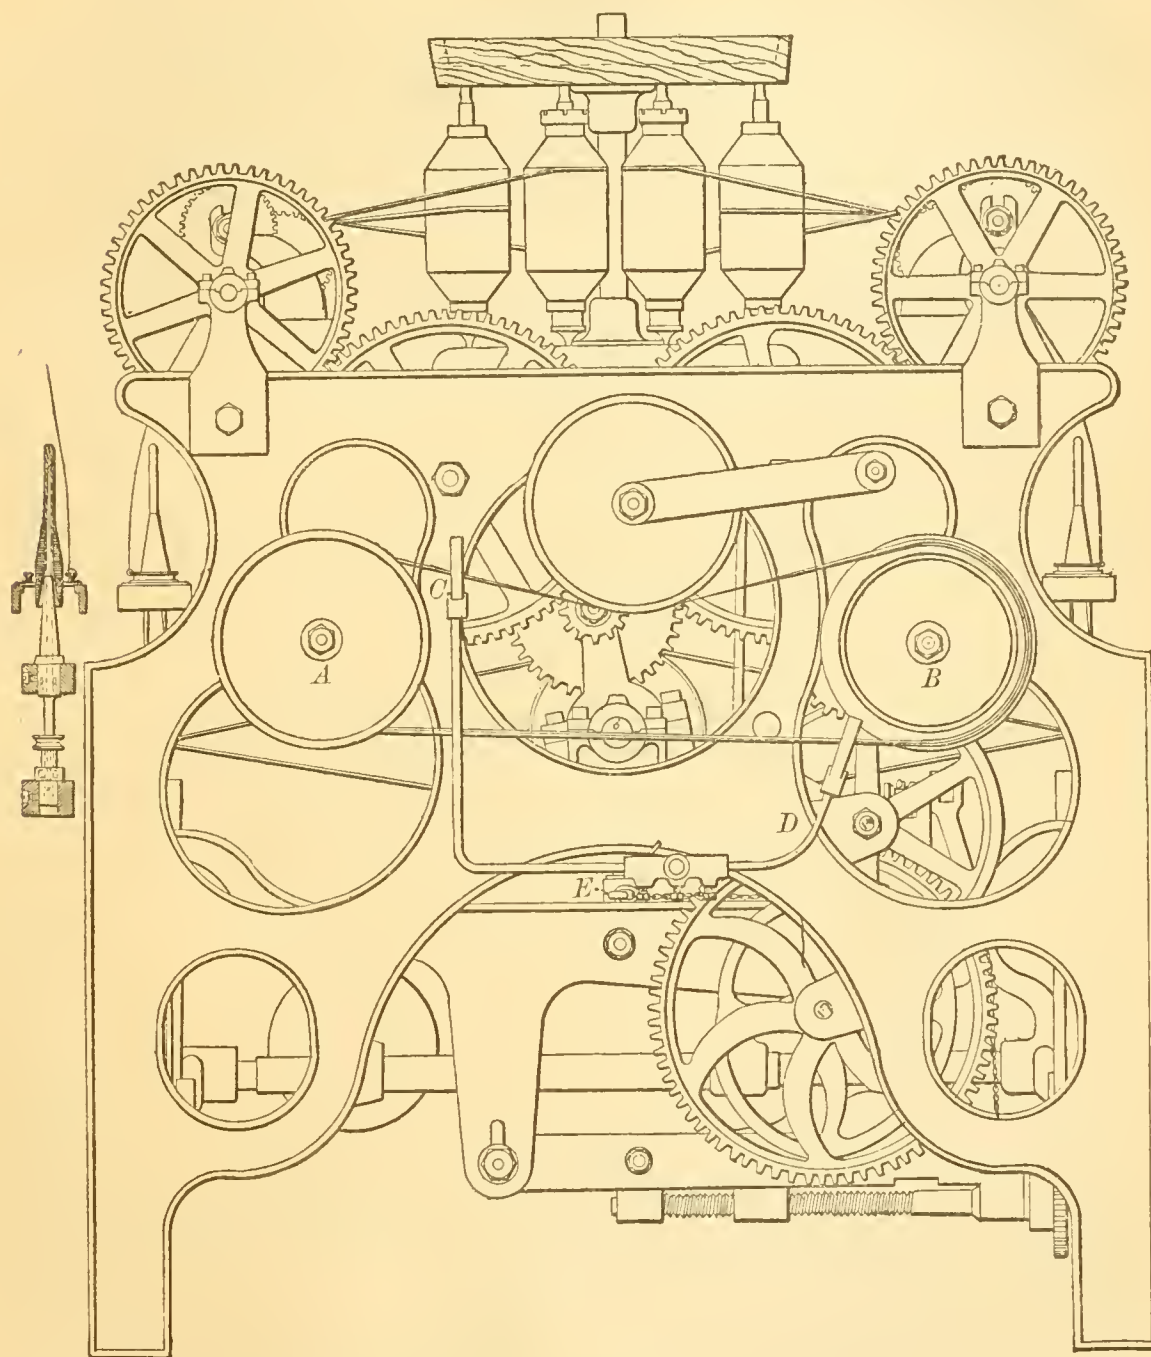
is a rear view of the ordinary form of English roving-frame, exhibiting the general arrangement of the gearing; and Fig. 877 is a front view, showing the spindles and the gears by which
